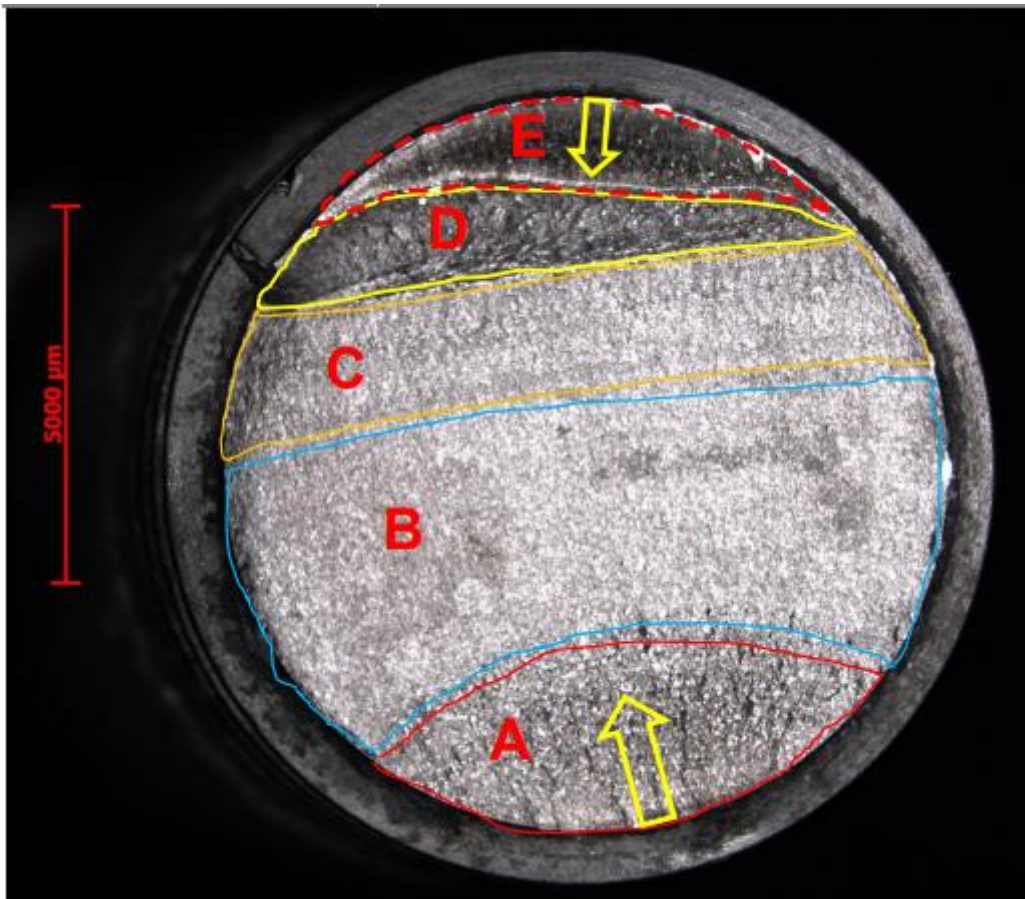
The Stereo-microscope inspection revealed a fracture surface geometry with distinct zones. The fatigue fracture initiated at opposing positions at the thread root and within Zones A and E, suggesting an alternating and opposing but unequal applied bending stress during operation.
